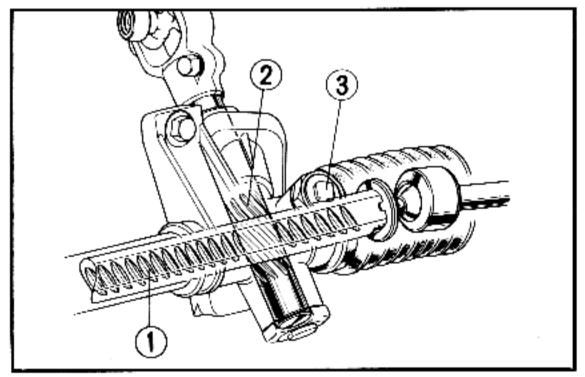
① Rack ③ Rack Adjusting Bolt ② Pinion Gear
